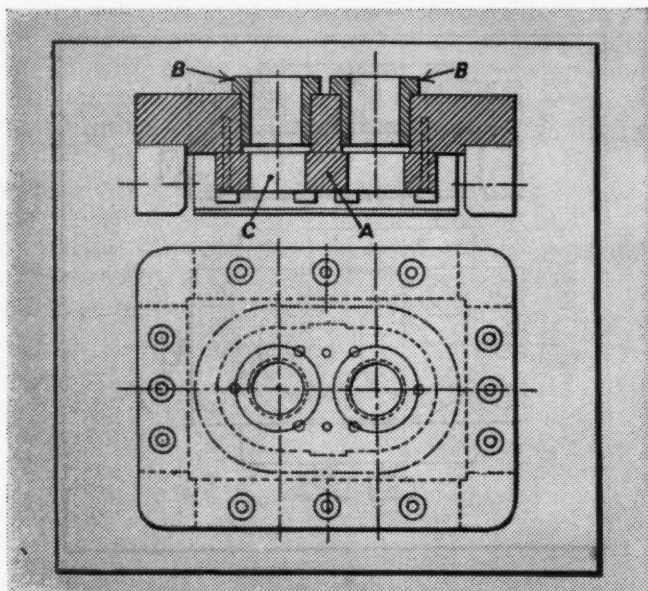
Jig Employed for Final Reaming of 0.7495-inch Holes, as Indicated in Fig. 1
